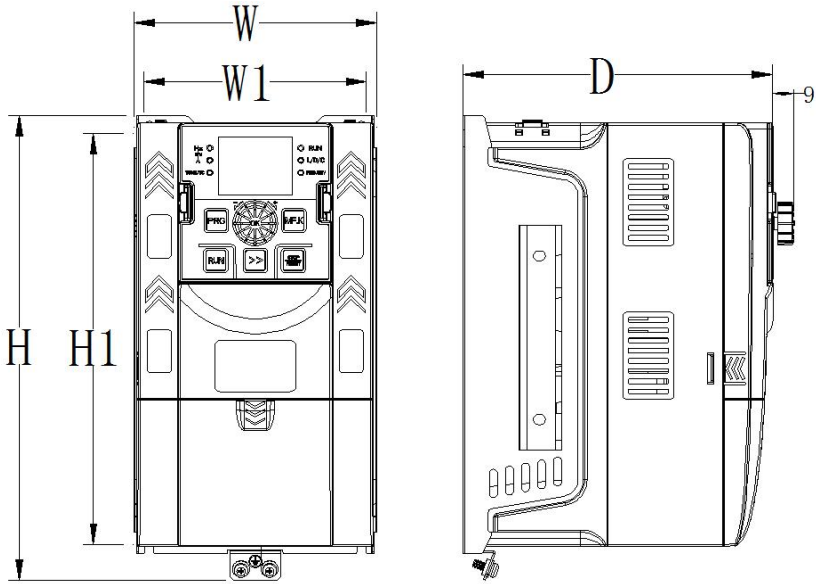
Plastic External/Mounting Dimensions for 380V 4T 11KW or less
